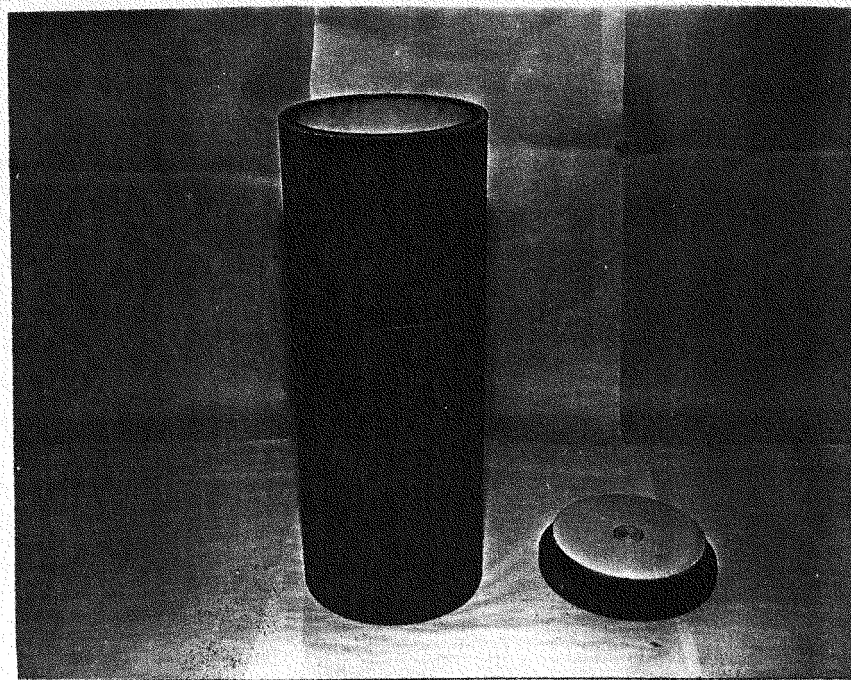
Gun barrel mold with egg cup (right). Mold interior is coated with a zirconium silicate slurry for protection.
